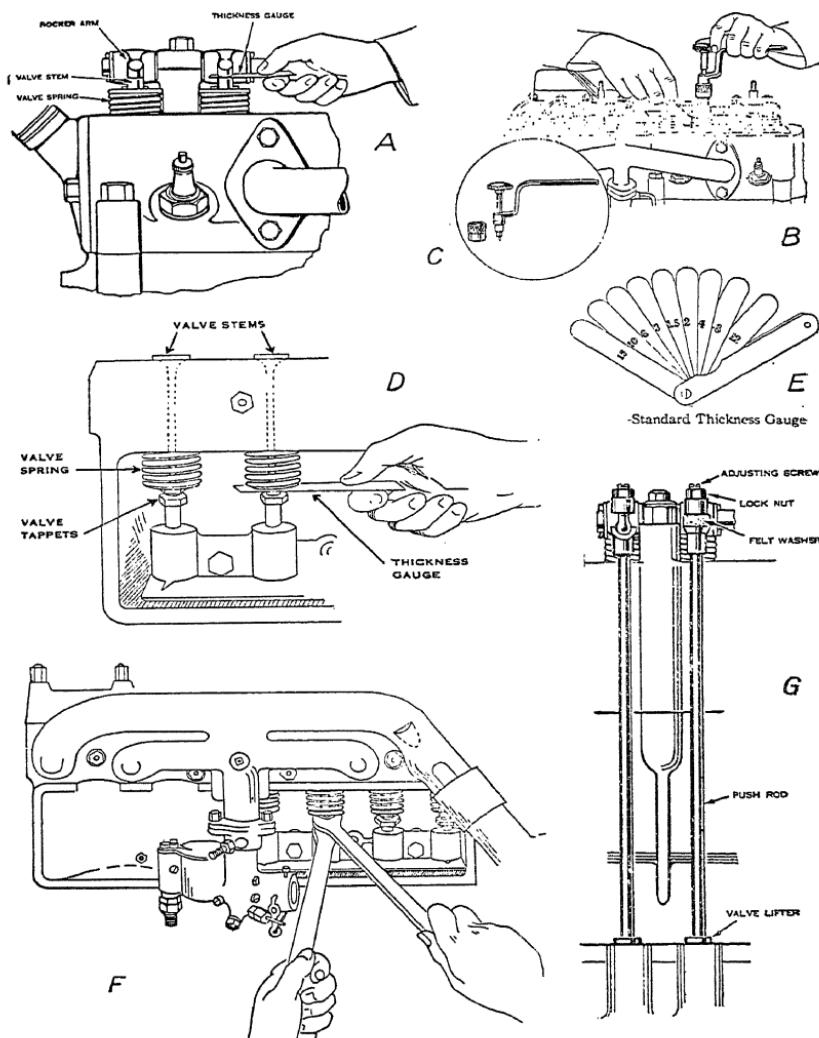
Testing and Adjusting Valve-Stem Clearance
